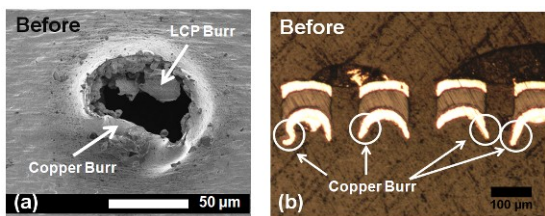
(a) LCP burr formation inside the through via wall, (b) copper burr formation in the bottom copper film after micro mechanical punching
